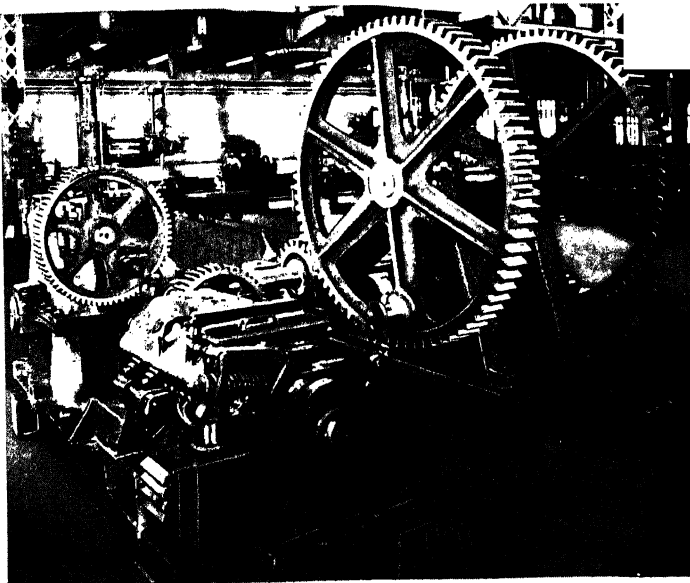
Gear assembly for tilting. (Courtesy *American Bridge Co.*, Pittsburgh, Pa.)
